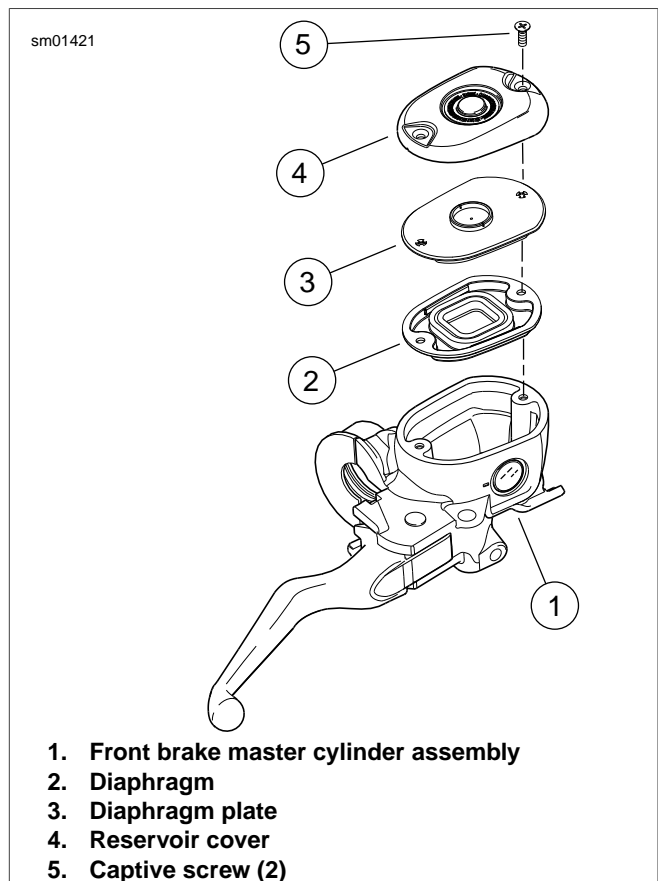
Front Brake Master Cylinder Cover Assembly
